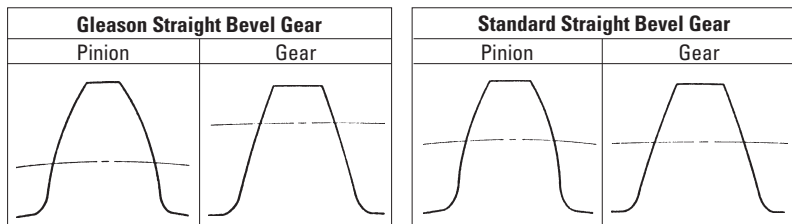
The Tooth Profile of Straight Bevel Gears
